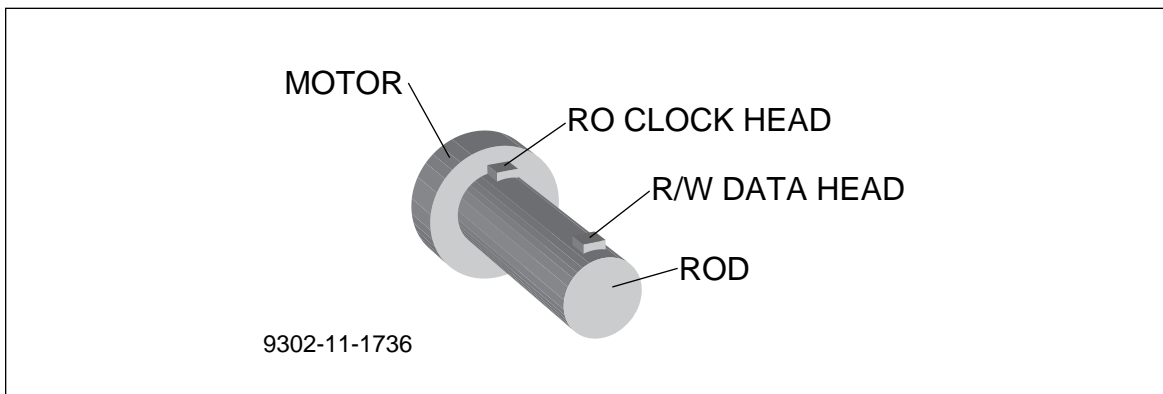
Rod & Motor Assembly Showing R/W Head and RO Clock Head
